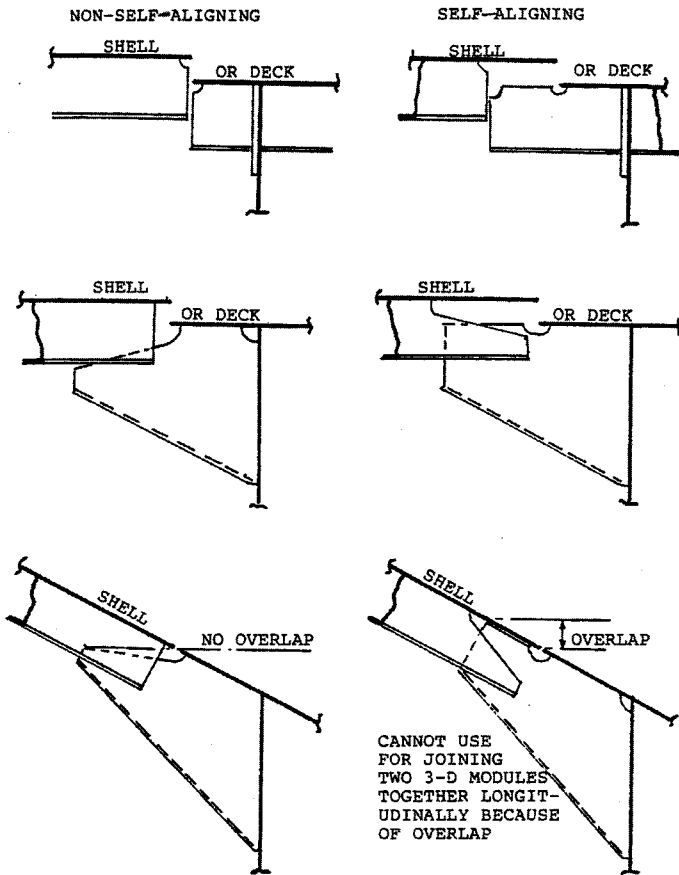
Shell Connect Alternatives in Way of Block Breaks
